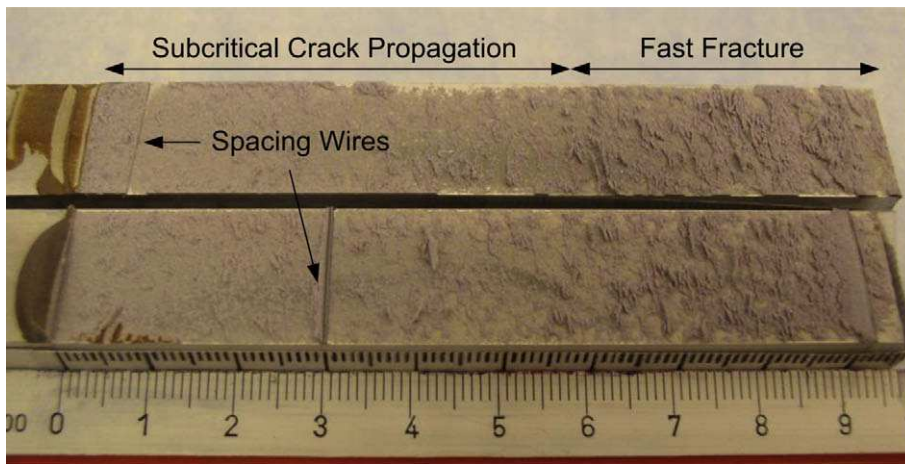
Fracture surfaces of two different aluminum SLS joints. The crack initiated from the fillet at the left end of each overlap shown. Bondline spacing wires, as shown above, are at 5 mm and 30 mm in upper and lower joints, respectively.
